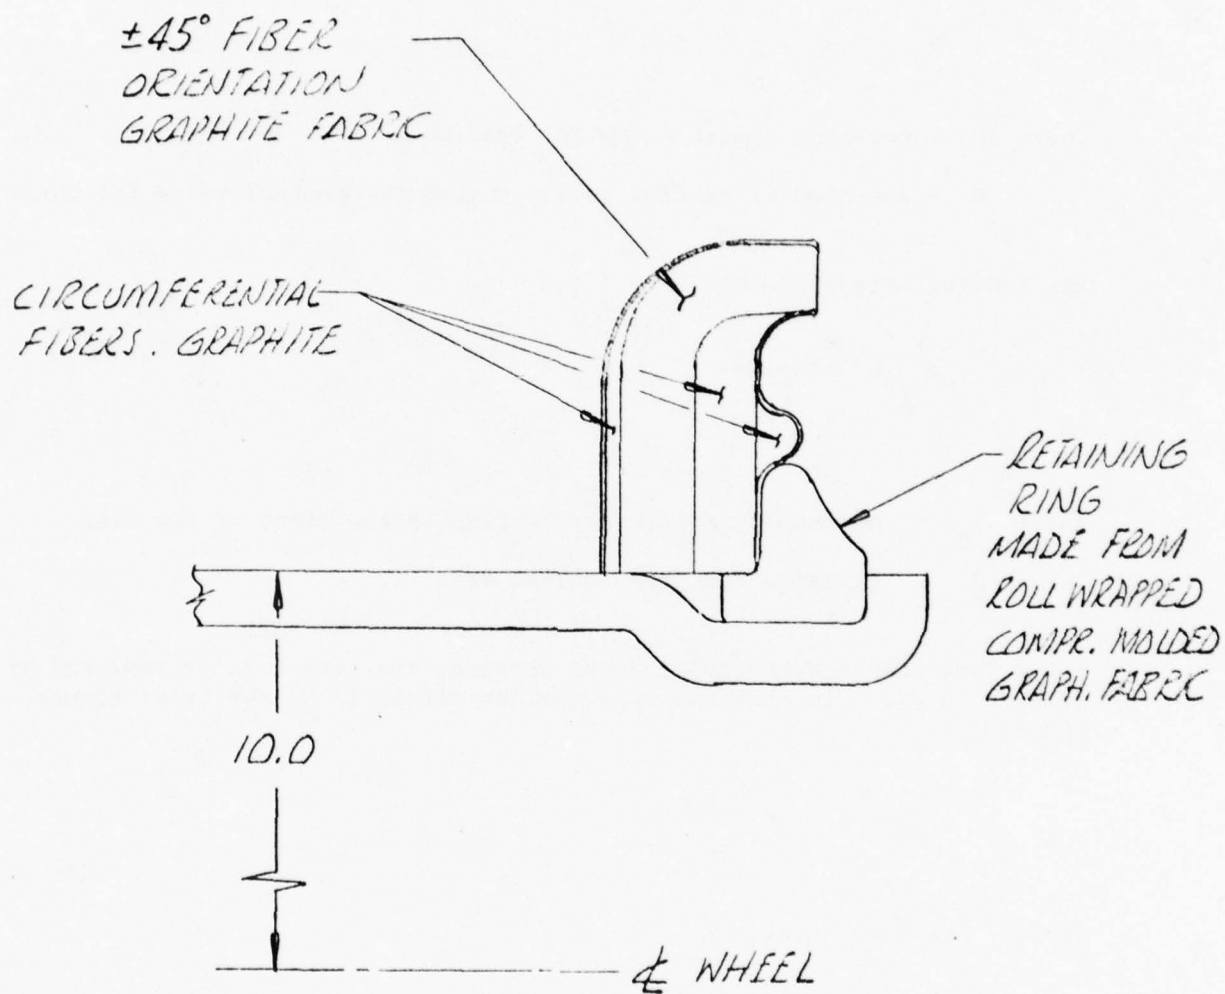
Detail of Rim - Removable Ring and Lock Ring
